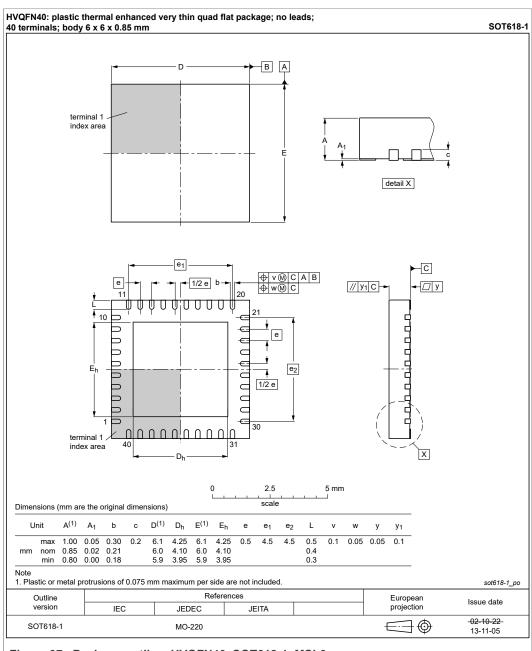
Package outline, HVQFN40, SOT618-1, MSL3
